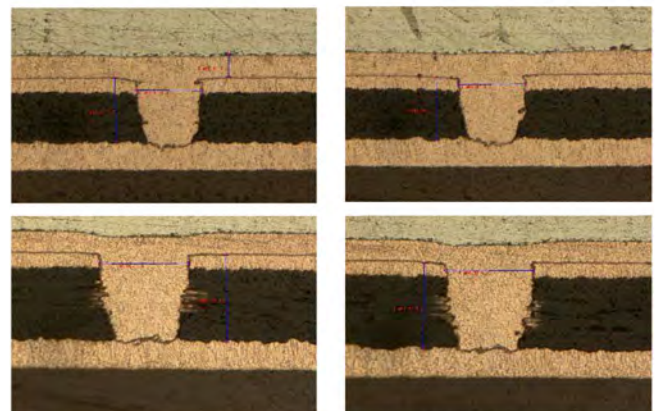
Solder dip test for through holes after six times the solder shock (eductor flow and soluble anodes).
